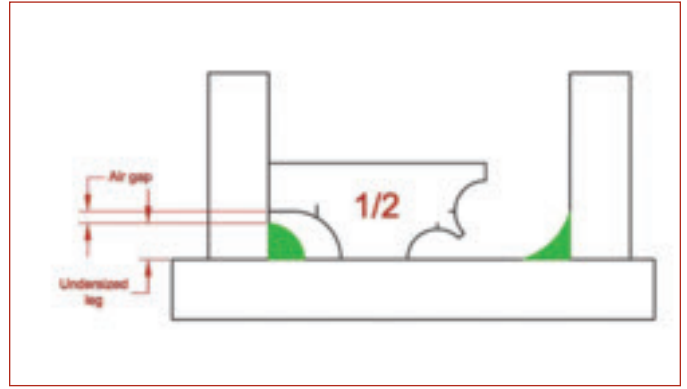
Undersized convex fillet weld. The vertical leg is too small.
